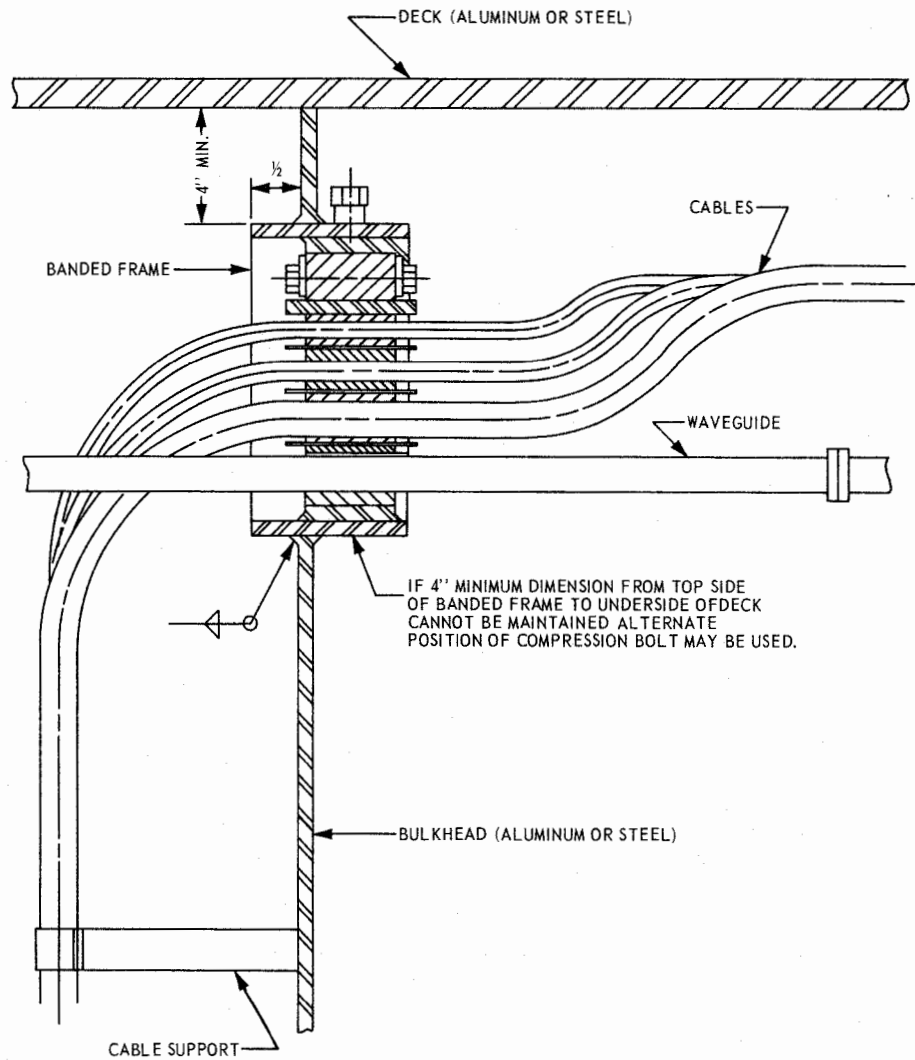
Two-Frame Multi-Cable Transit Device, Bulkhead Installed-Side View
